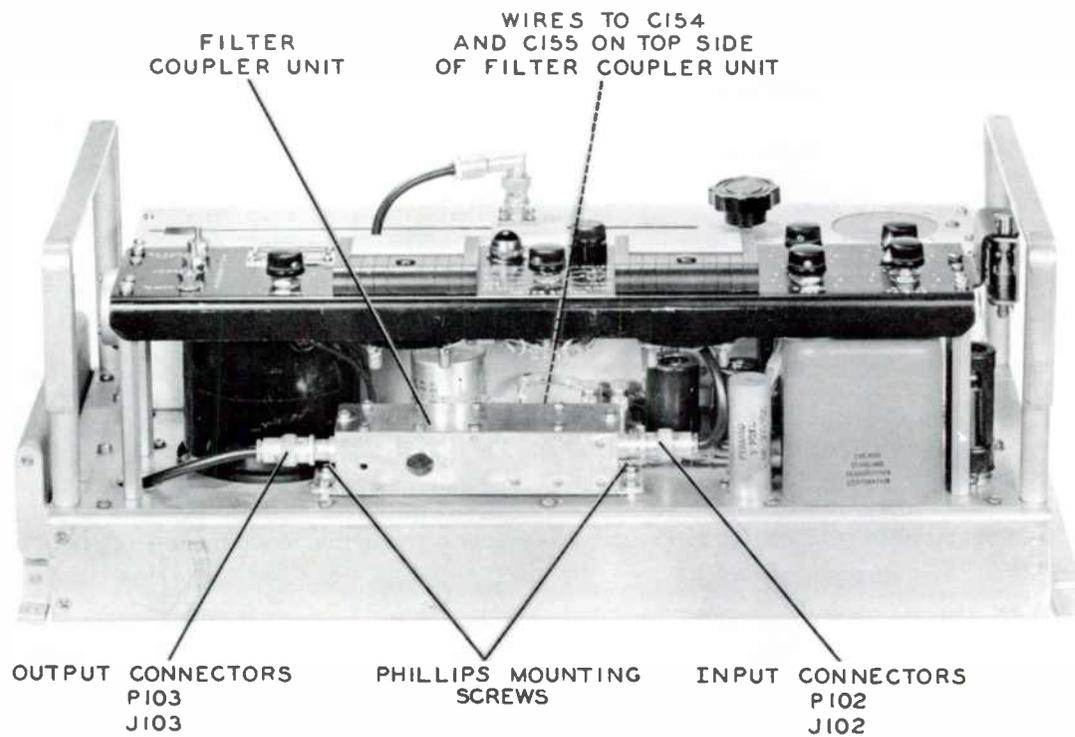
R-F Unit, Bottom View Showing Filter Coupler Unit
